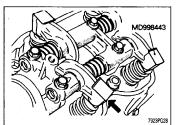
Install the auto lash adjuster holder to prevent them from falling out—2.4L (4G64) engines
